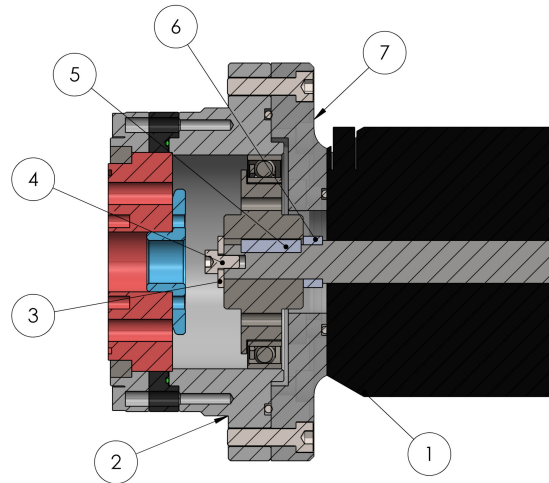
Detailed view of the Powered Joint designed in [8] 1) Motor 2) Harmonic Drive 3) Washer 4) Holding screw 5) Key 6) Spacer ring 7) Coupling flange
